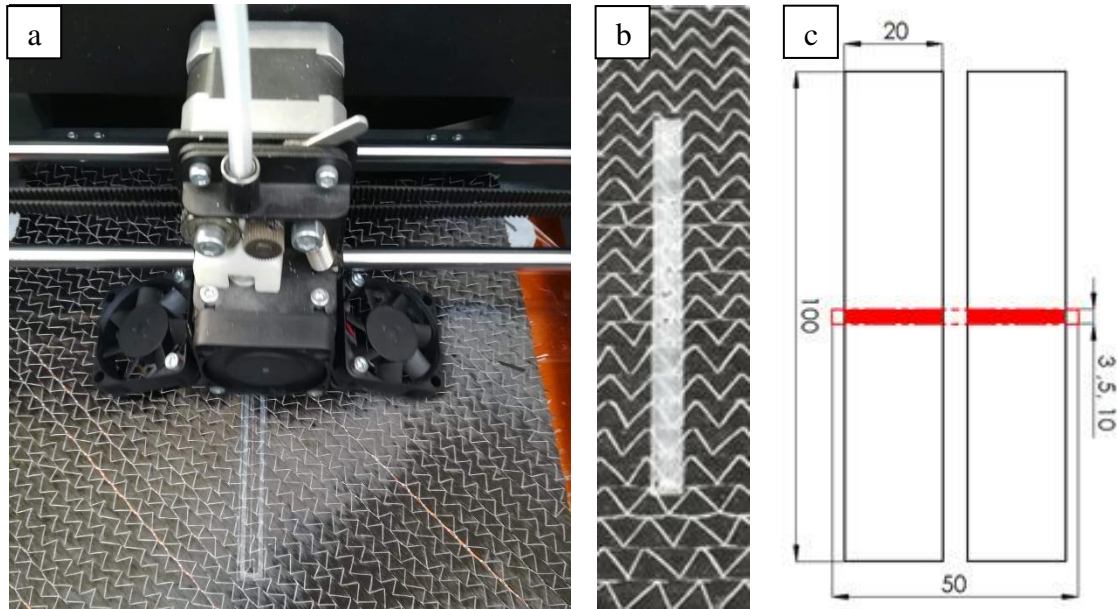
(a) printing of the interfacial pattern; (b) printed pattern; (c) specimen layout (red area represents the shape and location of the printed pattern).
